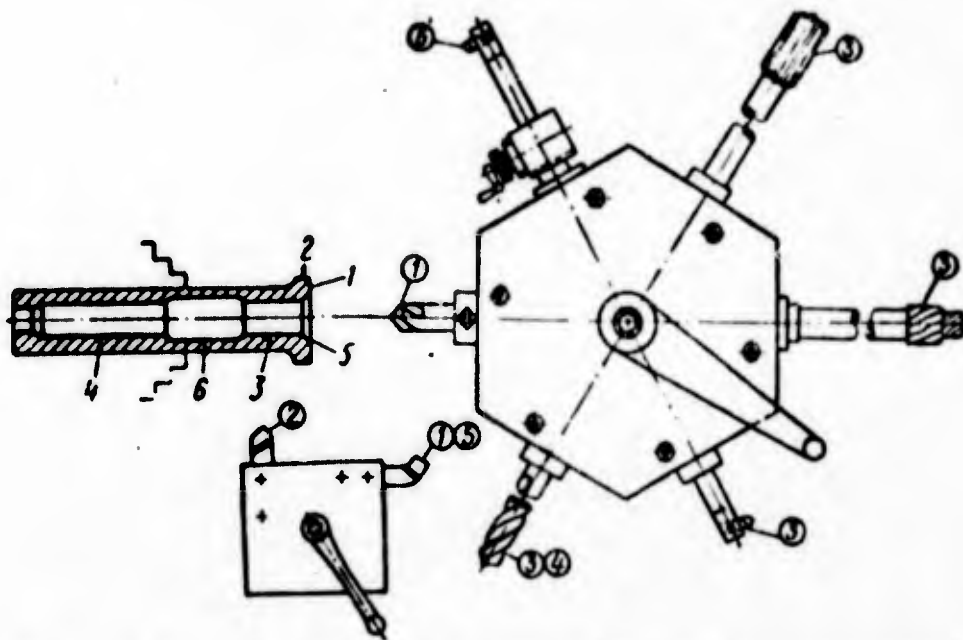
Set-up of turret lathe for processing holes and external surfaces of a shaft.
